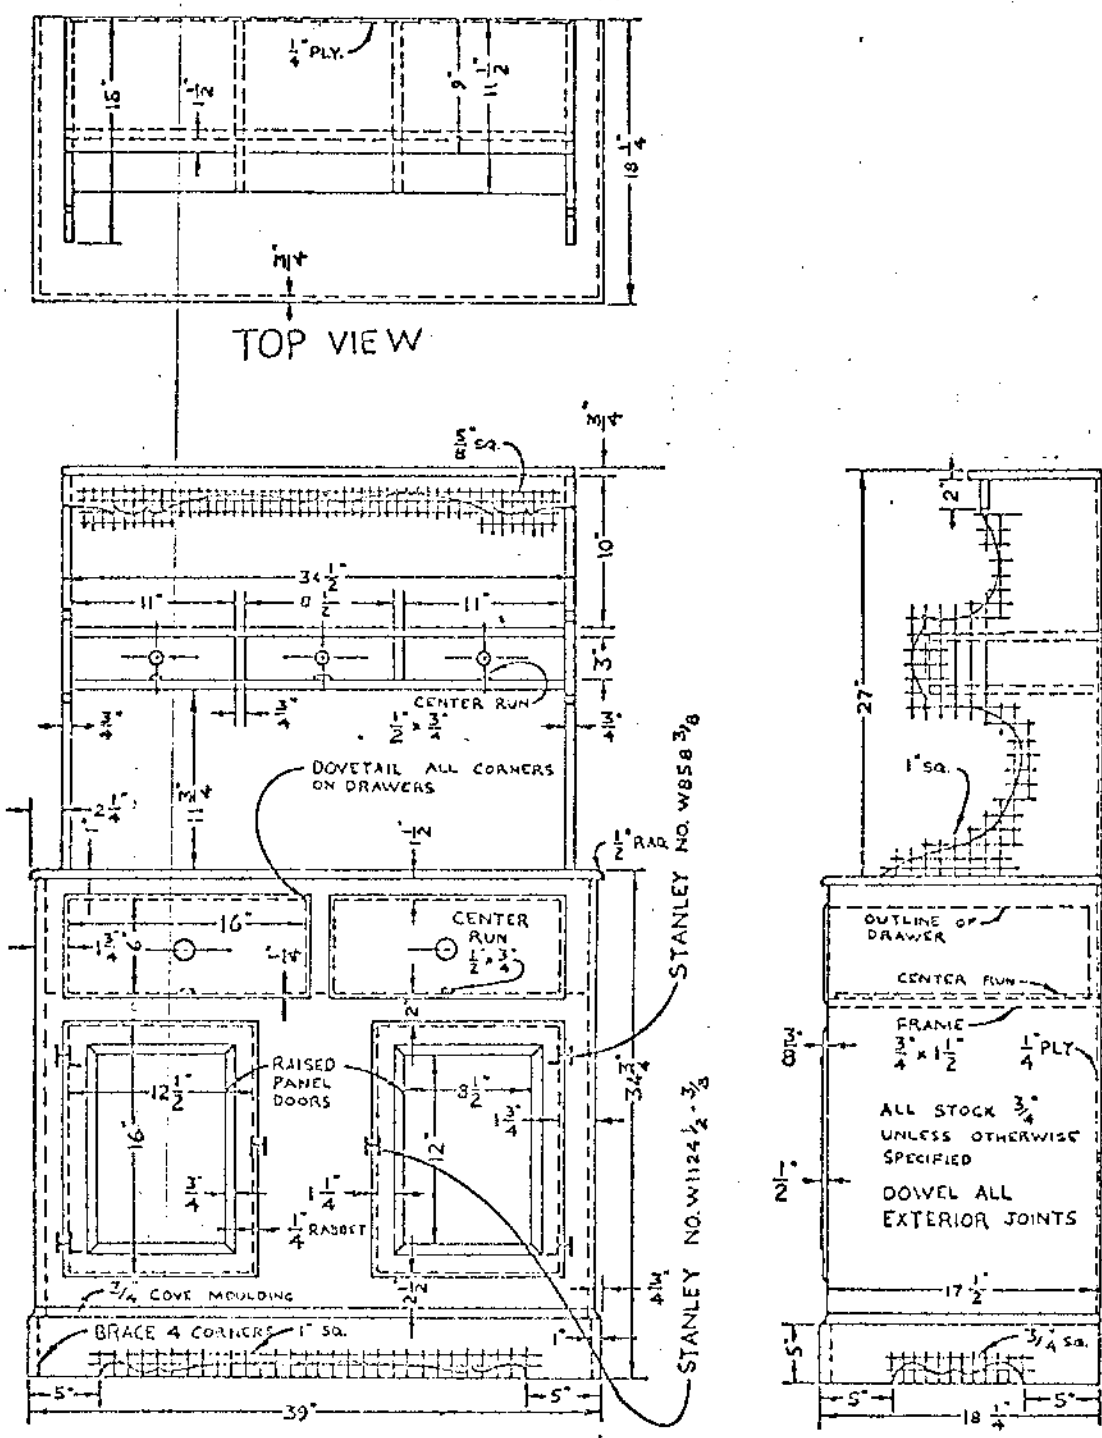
China cabinet, suitability considered good for high school-college level, Stanley Tool Company, Project Plans for Woodworking, New Britain, Connecticut.
